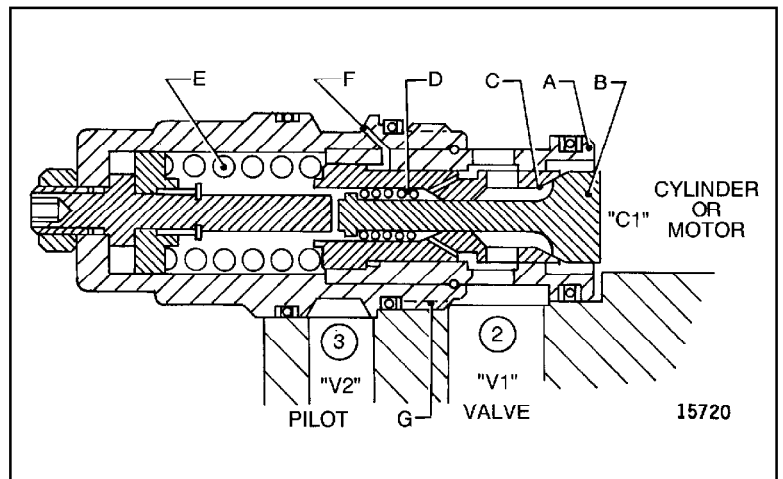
CUTAWAY VIEW OF COUNTERBALANCE VALVE
